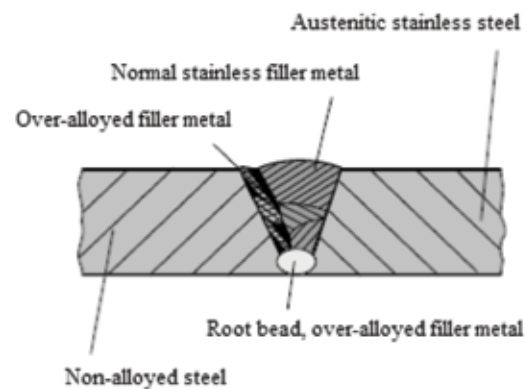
The joint of non-alloyed and stainless steel using buttering weld
